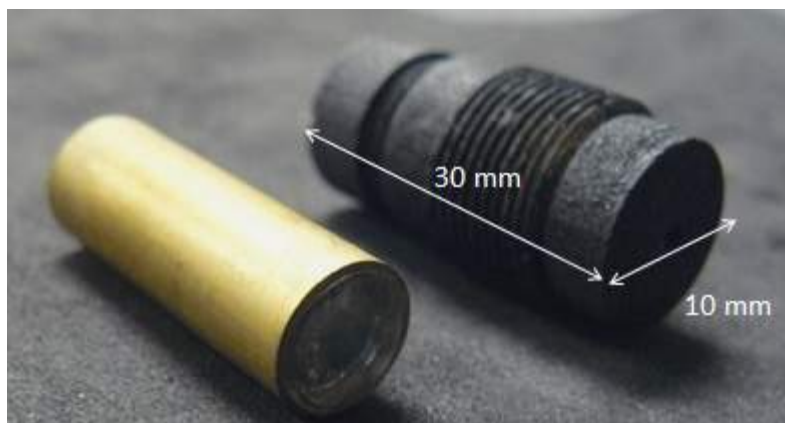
Assembled plastic objective inside brass tubing (left). 3D printed threaded objective holder (right).
